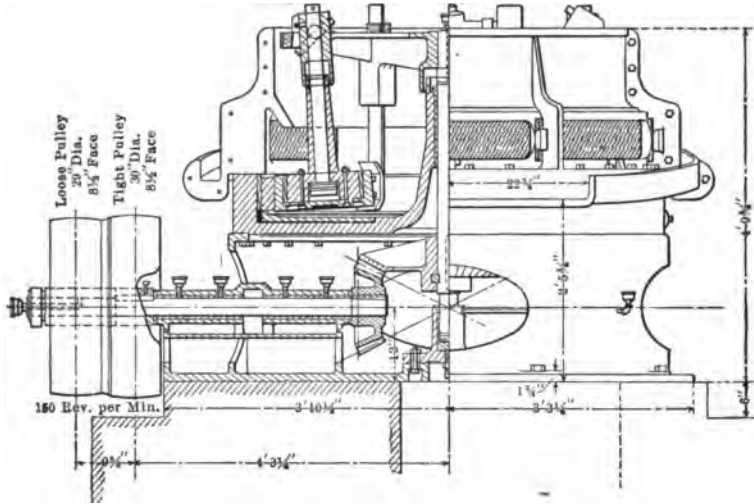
IMPROVED HUNTINGTON MILL.
